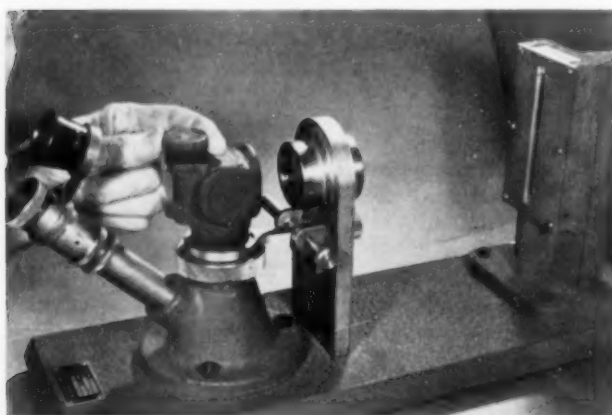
Dummy prism, used when assembling rotating head, avoids injury to glass unit during this process.
